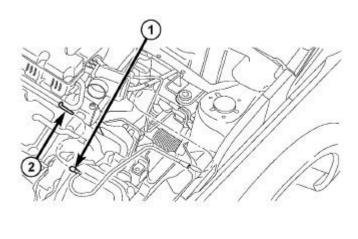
INTAKE RETAINER VIEW Courtesy of CHRYSLER LLC
